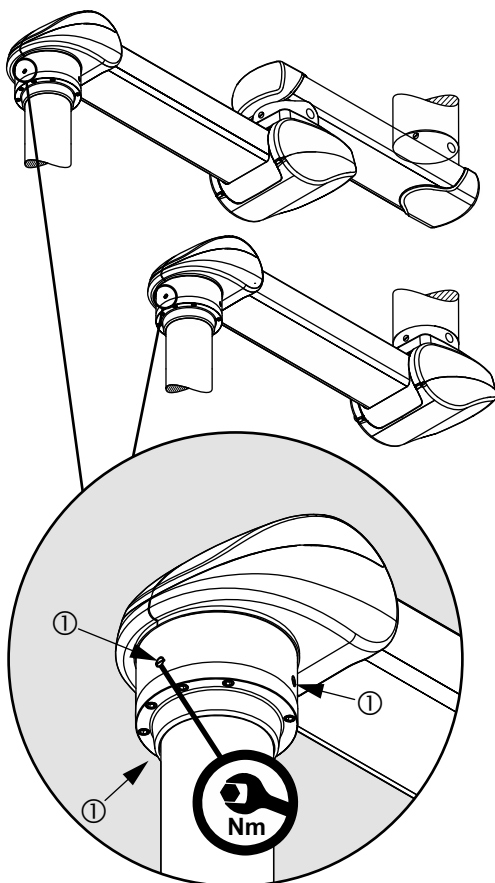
Adjusting the brake on the Drop tube Friction (roller bearing)
